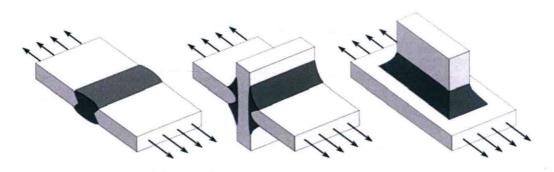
Specimen: butt welded joints, cruciform joints and longitudinal stiffeners (principle).
